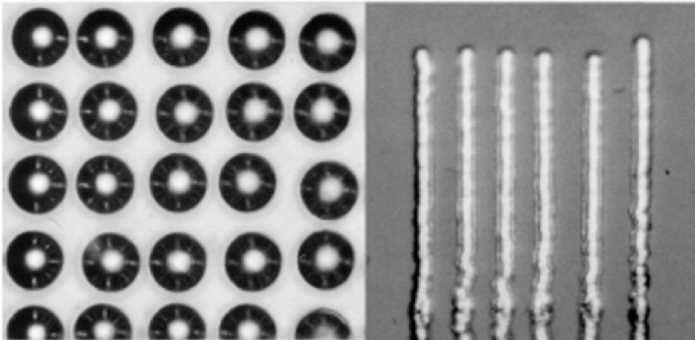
25- μm bumps of Sn/Pb solder on 35- μm centers; *Right* is 24- μm solder towers
